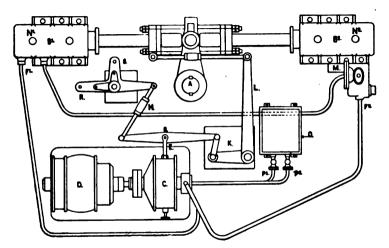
,-Hele-Shaw Electric Hydraulic Steering Gear.
